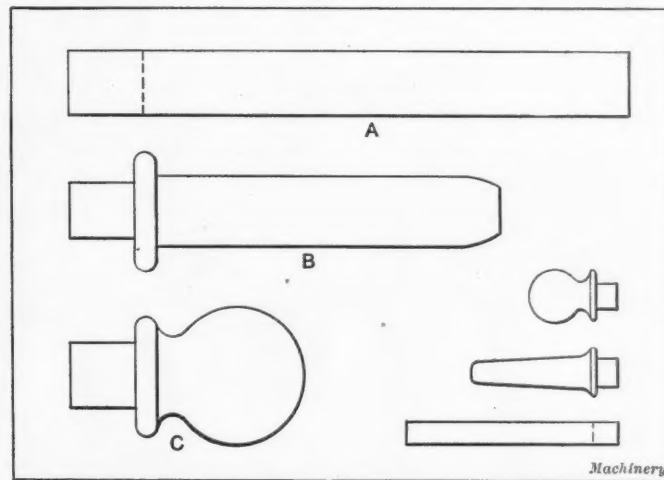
Typical Examples of Reheading requiring an Open-die Machine
